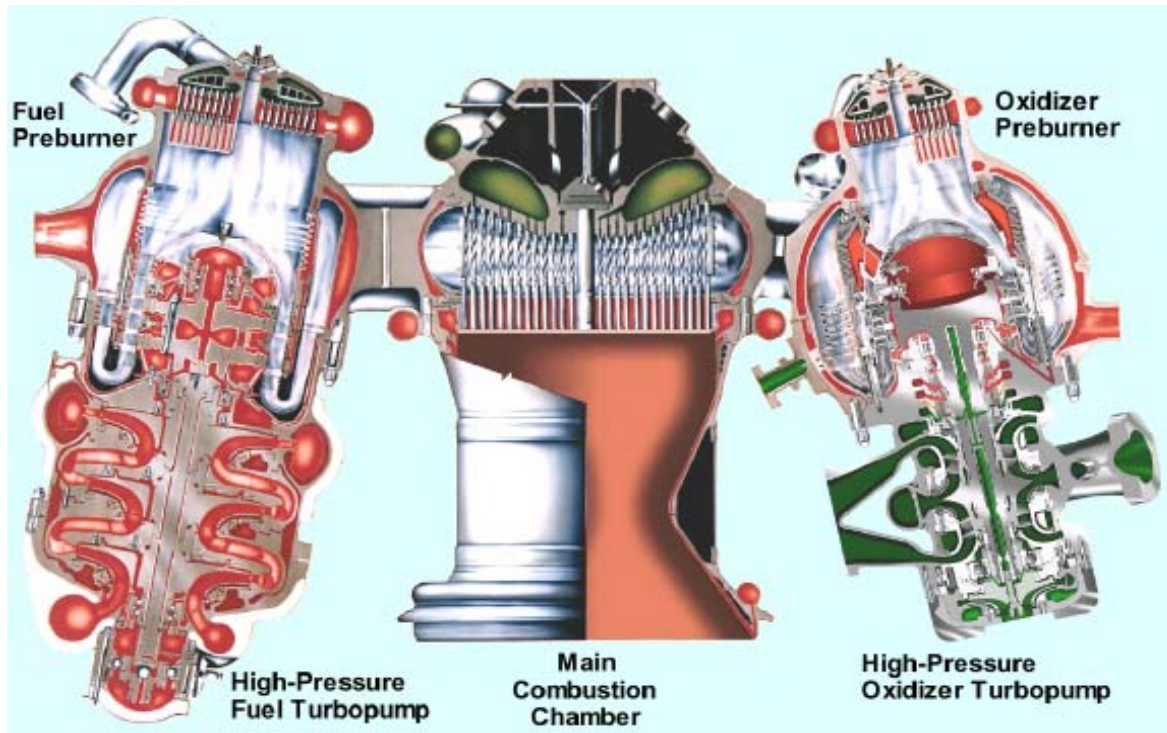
SSME Powerhead with preburners, turbopumps and thrust chamber assembly [11]
